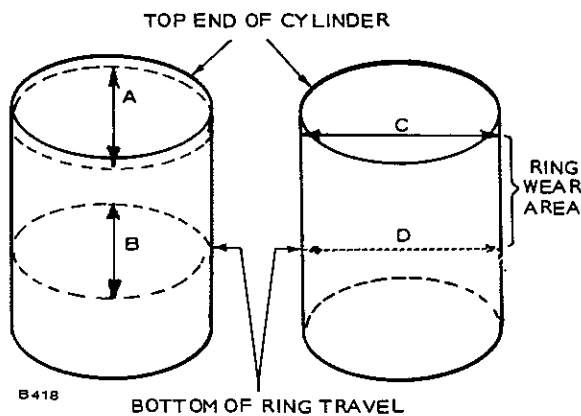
CYLINDER BORE MEASUREMENT
